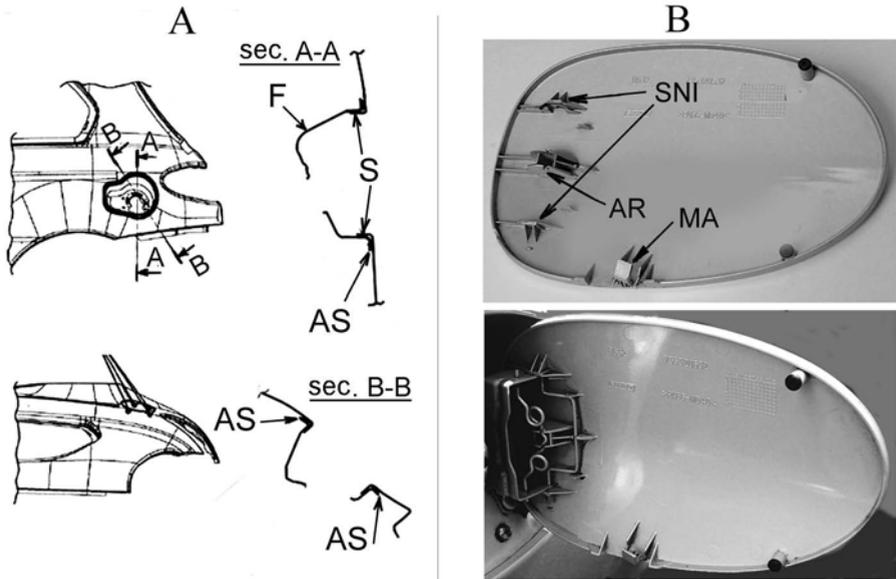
A) Example of metal housing welded and bonded to quarter panel; F: housing bottom; S: spot welds; AS: structural adhesive. B) Example of thermoplastic (polyamide) filler flap, both free and fitted to body; SNI: hinge holes; AR: reaction spring clamp; MA: integral hook.
